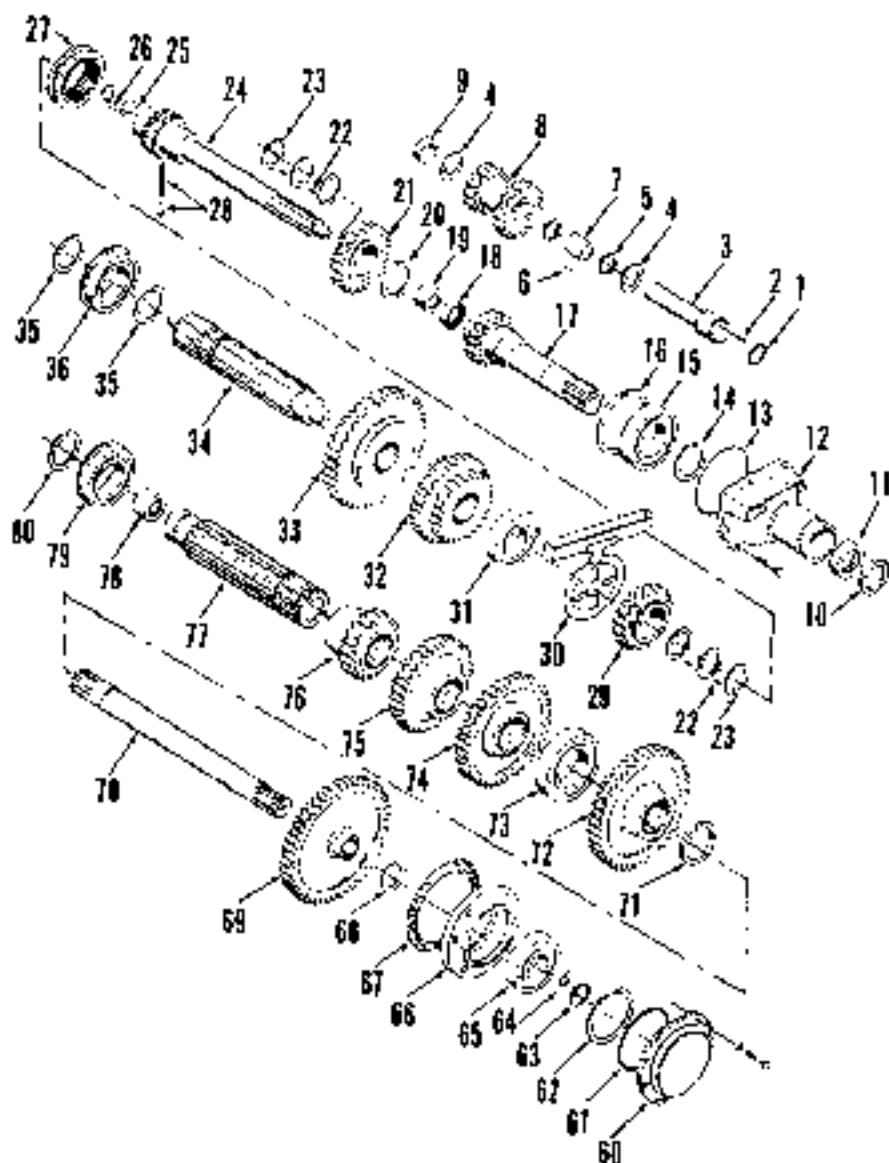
Exploded view of manual shift transmission input shafts, mainshaft, reverse idler, pto lower shaft, countershaft and related components. Planetary unit is shown in Fig. 139.
